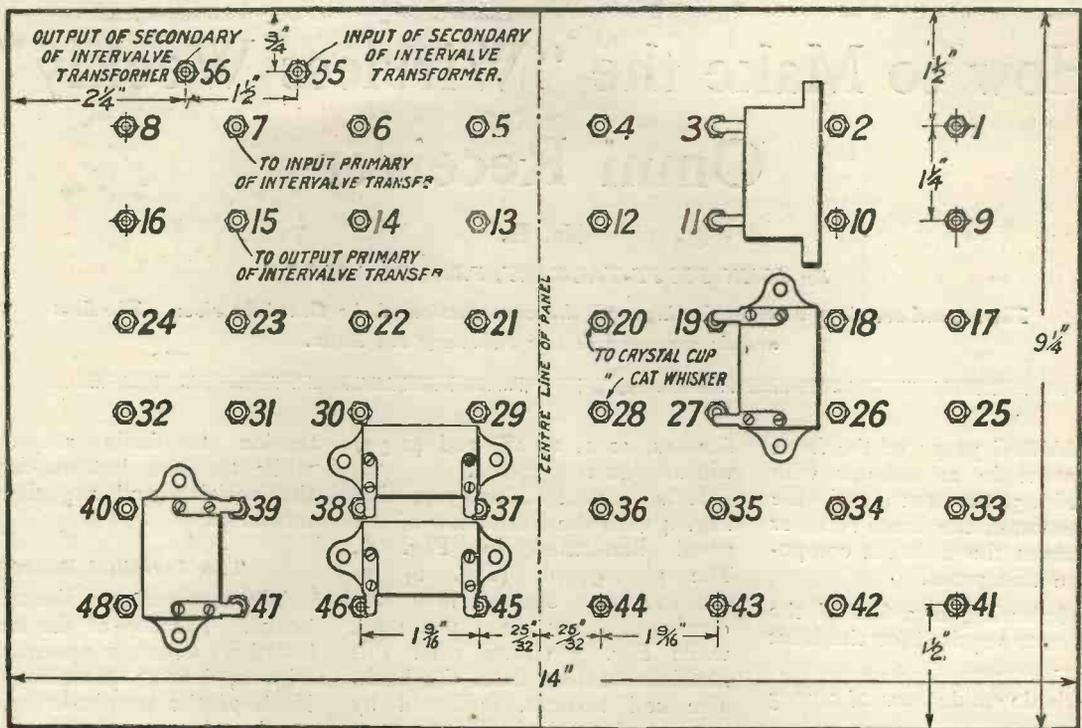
The reverse of terminal board, illustrating method of attaching fixed condensers.
